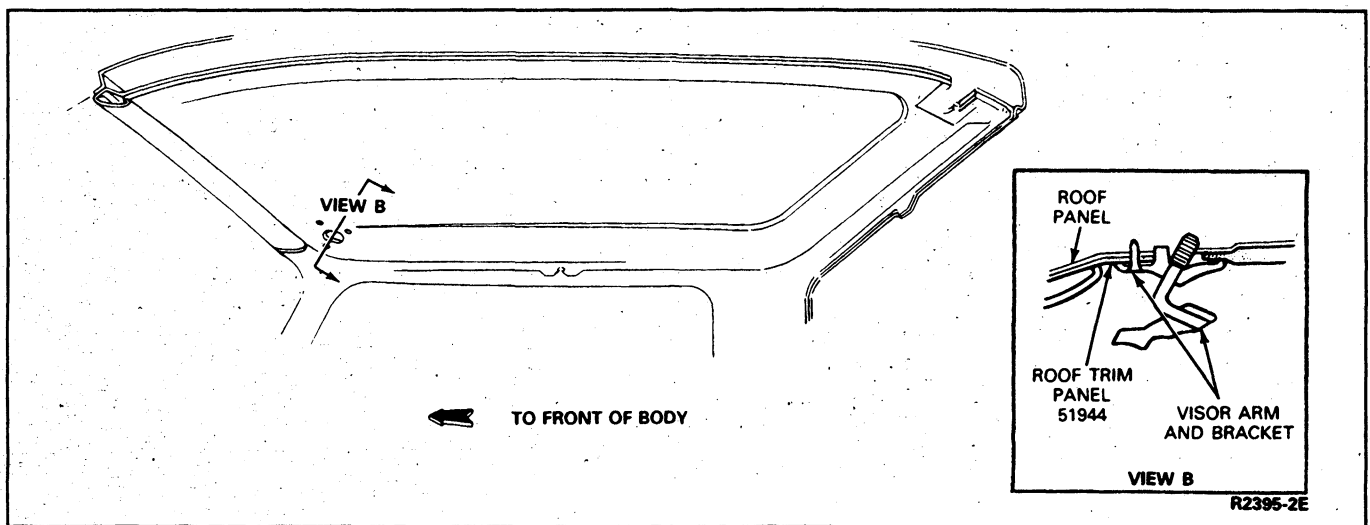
Roof Headlining Assembly—F-150—F-350 and F-Super Duty
